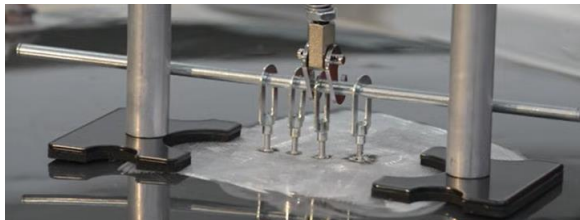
Unbending the sheet by pulling using welded washers [13]
